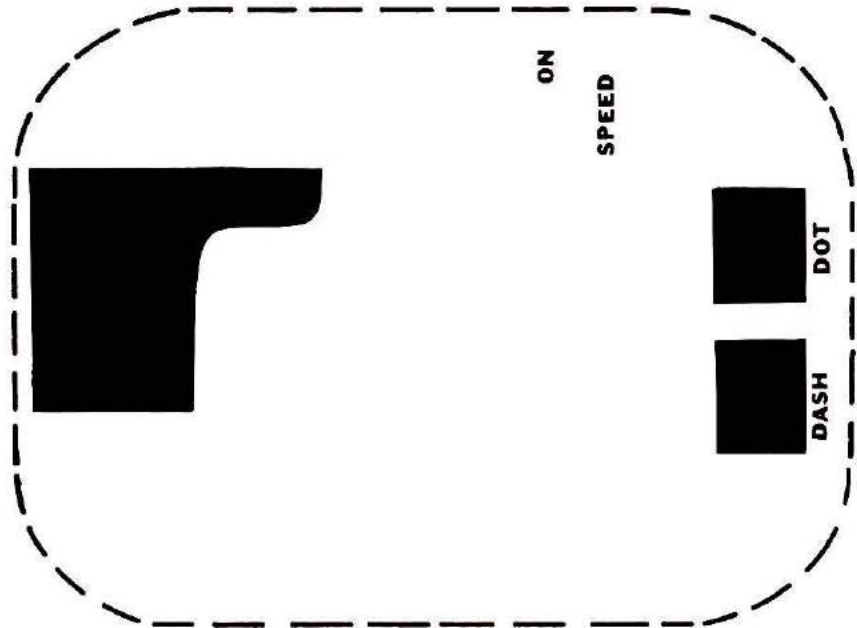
This is an etching pattern for the printed-circuit board assembly. The circuit traces go on the bottom; the pads and identification go on the top.
